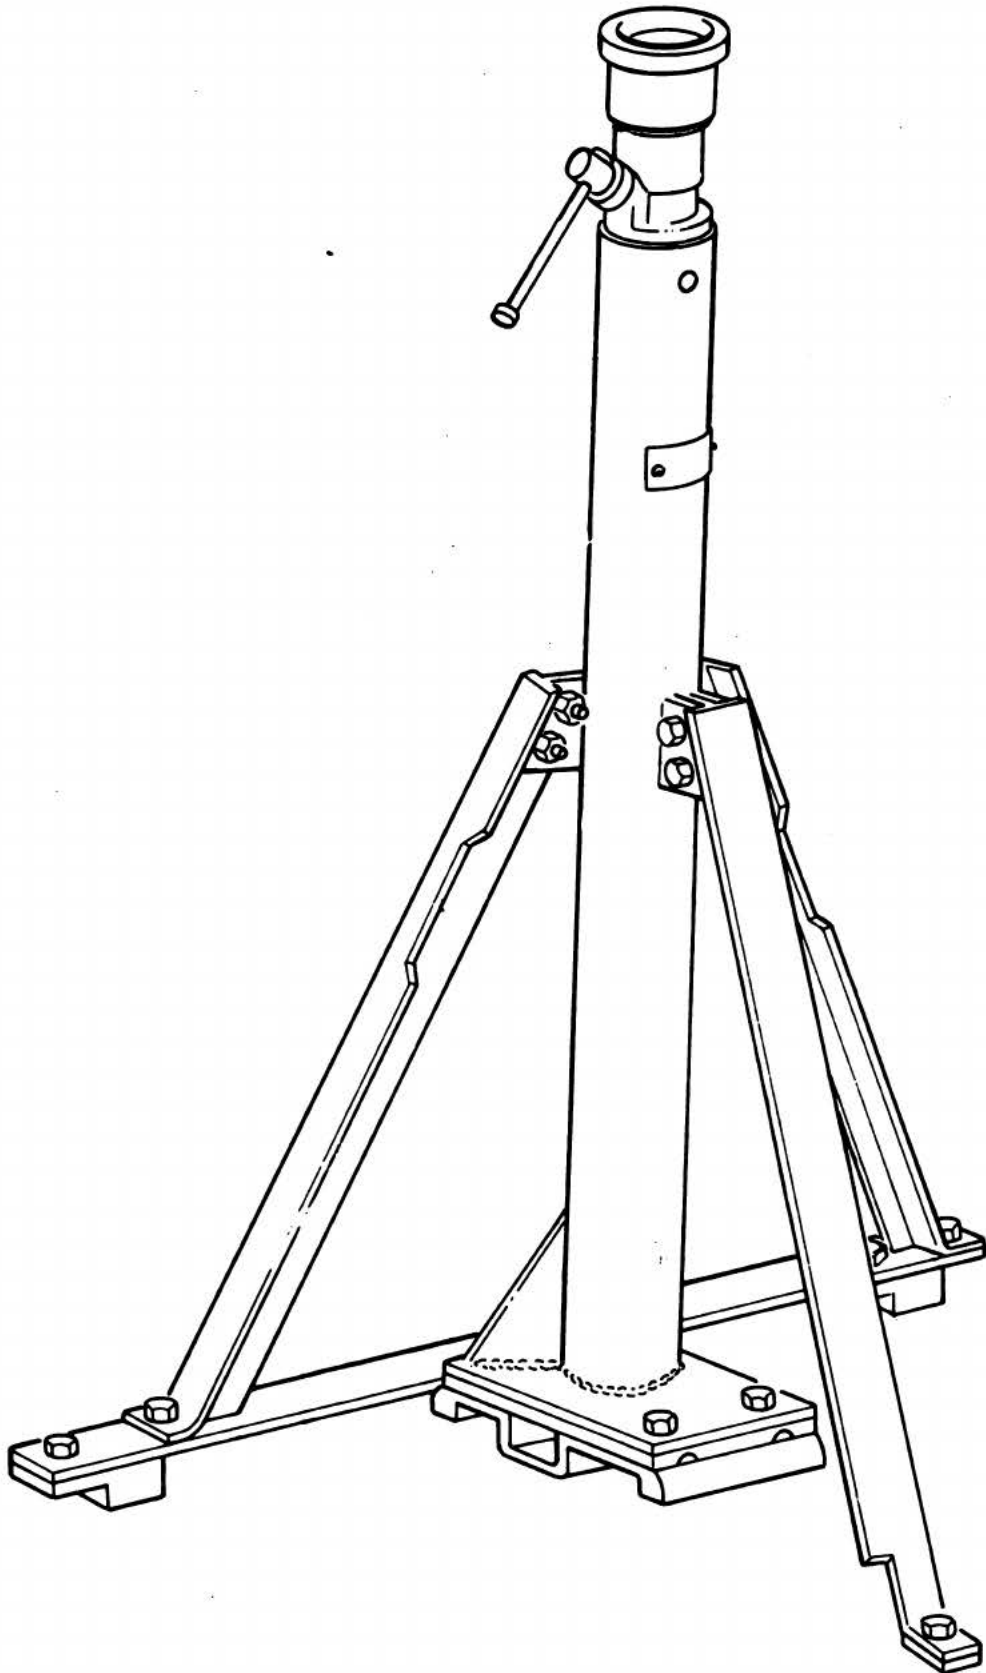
Mount, machine gun — 6590045 — right front view.
